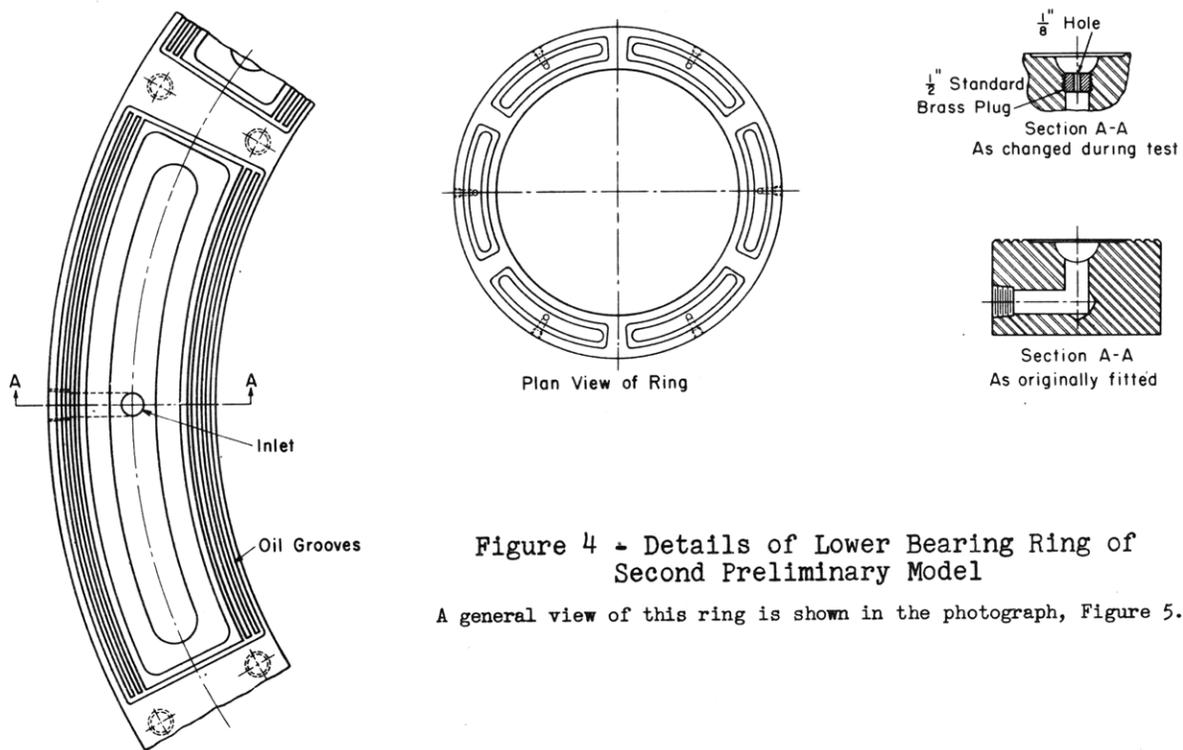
Details of Lower Bearing Ring of Second Preliminary Model
